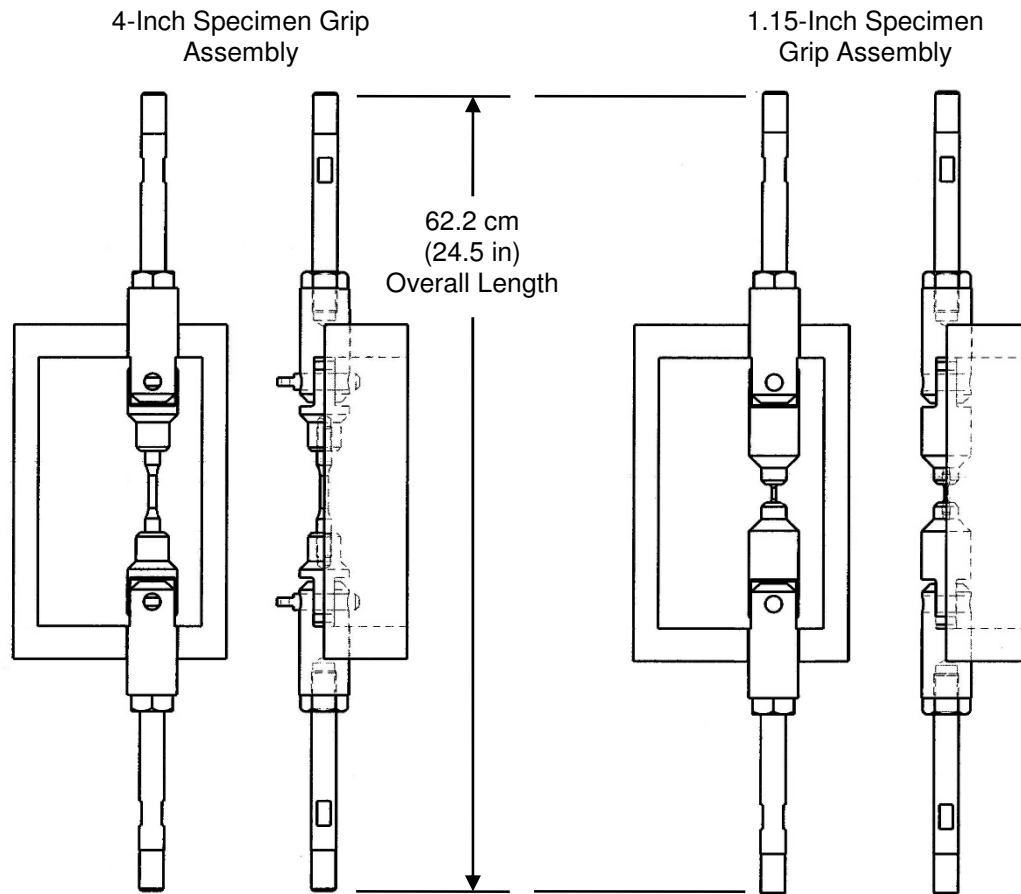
High Temperature Tensile Grip Assembly for 1.15-Inch Specimens
